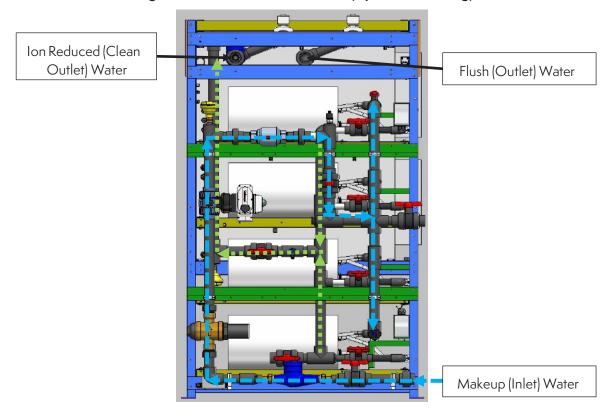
B: EWS Water Flow Path (Inlet/Outlet Piping)
